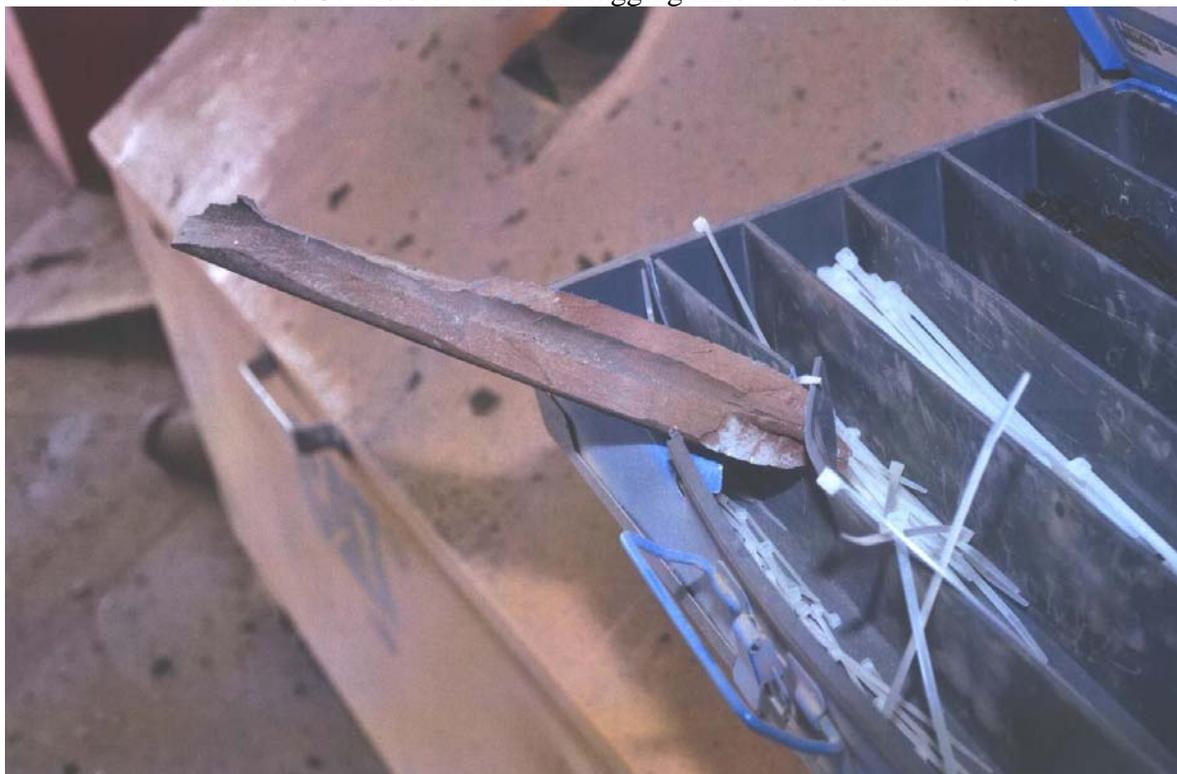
Visible Material on Inner Bore and Fractured Surfaces of Item No. 13
